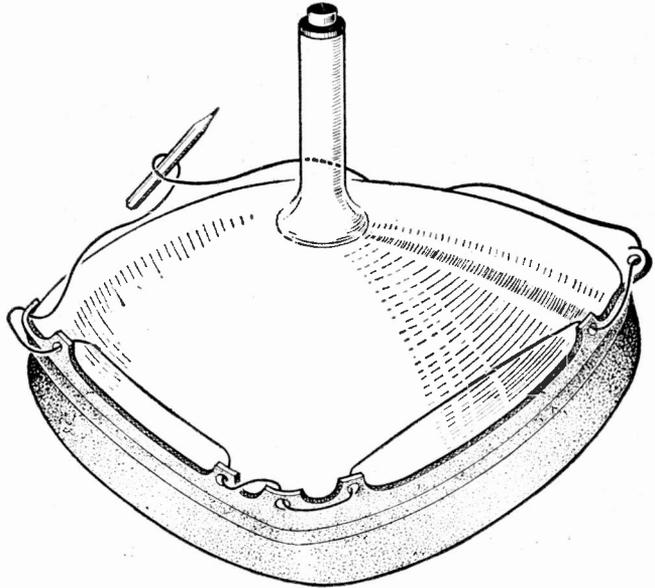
Refitting the Cornehl safety hood to the latest type of tube.
